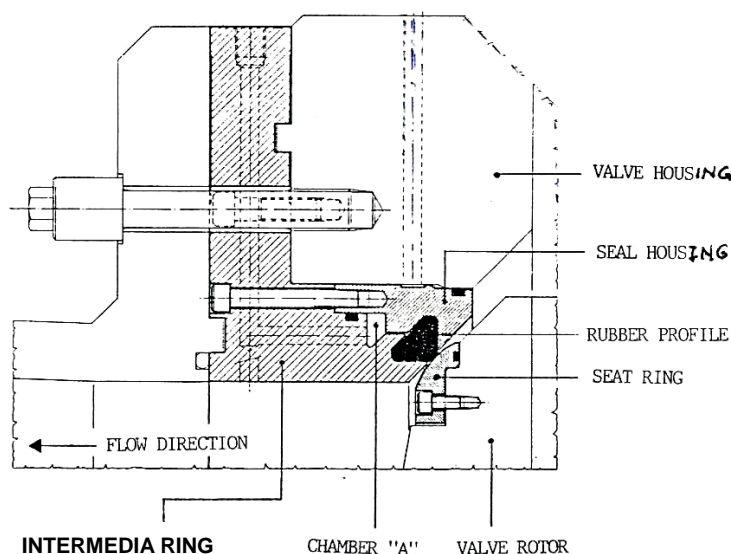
Rubber valve seal for spherical valve. (Inflatable with water pressure)
